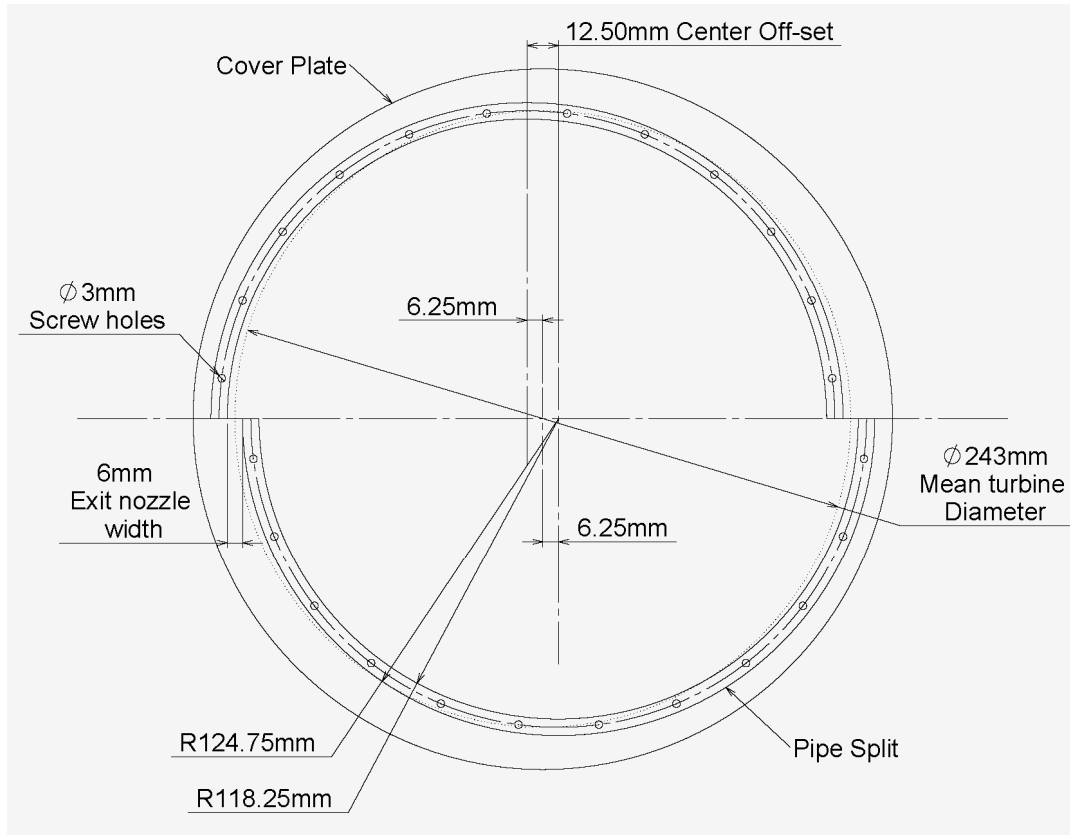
Machining of screw holes on pipe splits (All dimensions in mm)
